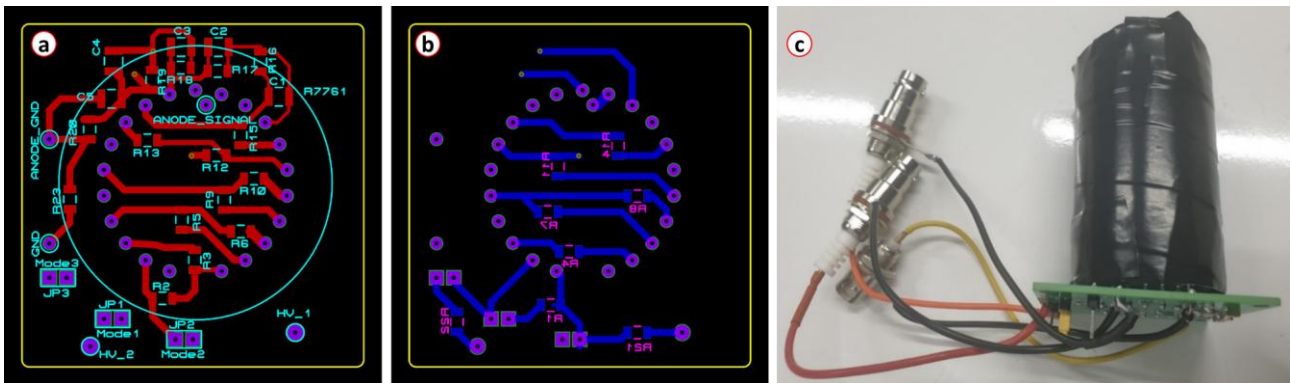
a) PCB layout view of the top side and b) bottom side c) Image of the electronic board with all soldering and assembly processes completed for the manually controlled R7761 type PMT.
